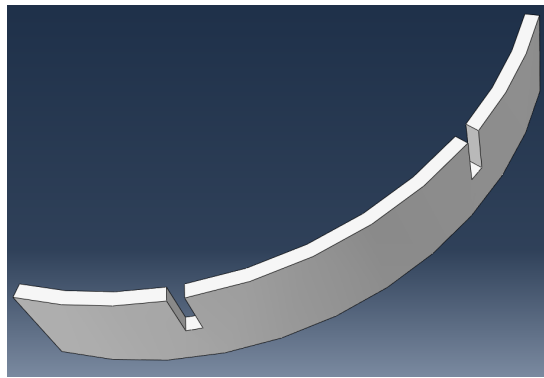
The modifications made in order to simplify the welding plate.
